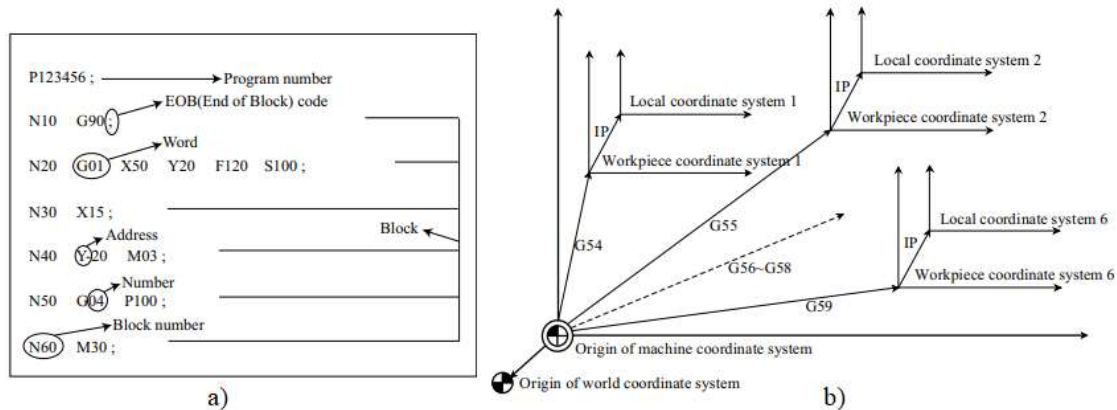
a) Program structure; b) Machine, workpiece, and local coordinate systems [3]
